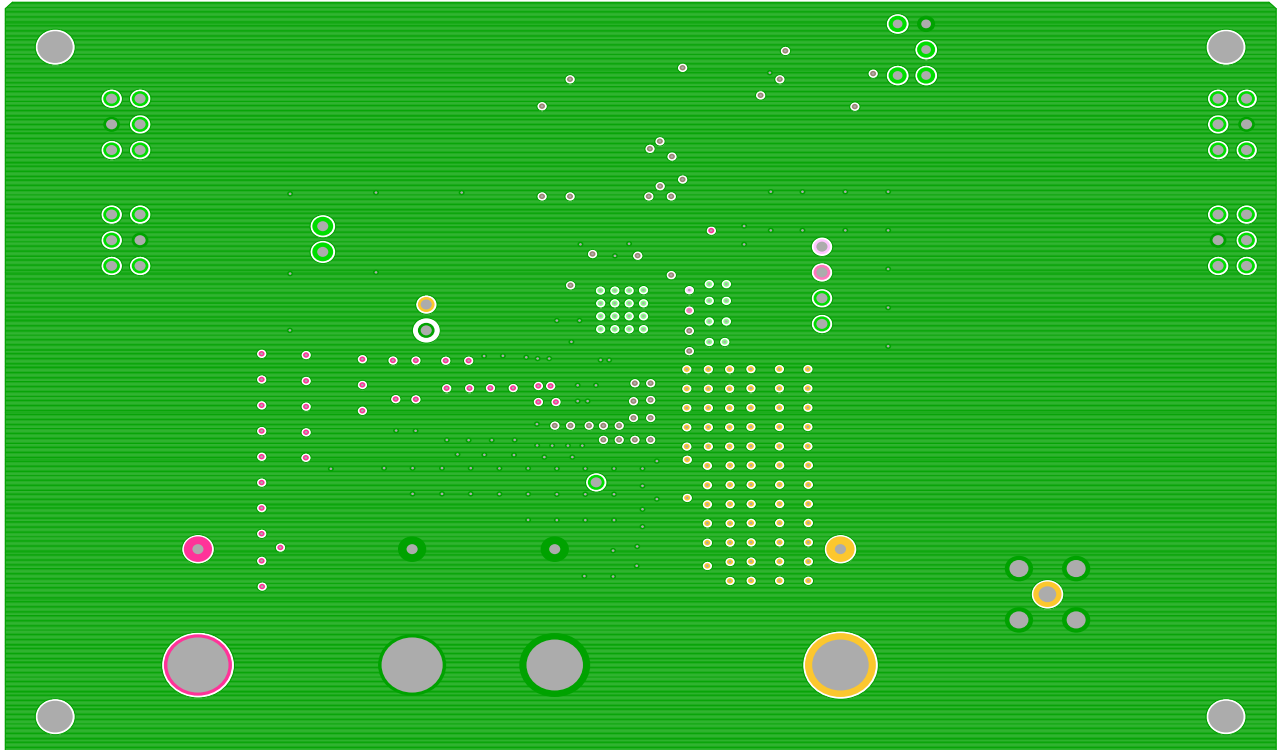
PCB - INNER LAYER - LAYER 2 (TOP VIEW)
